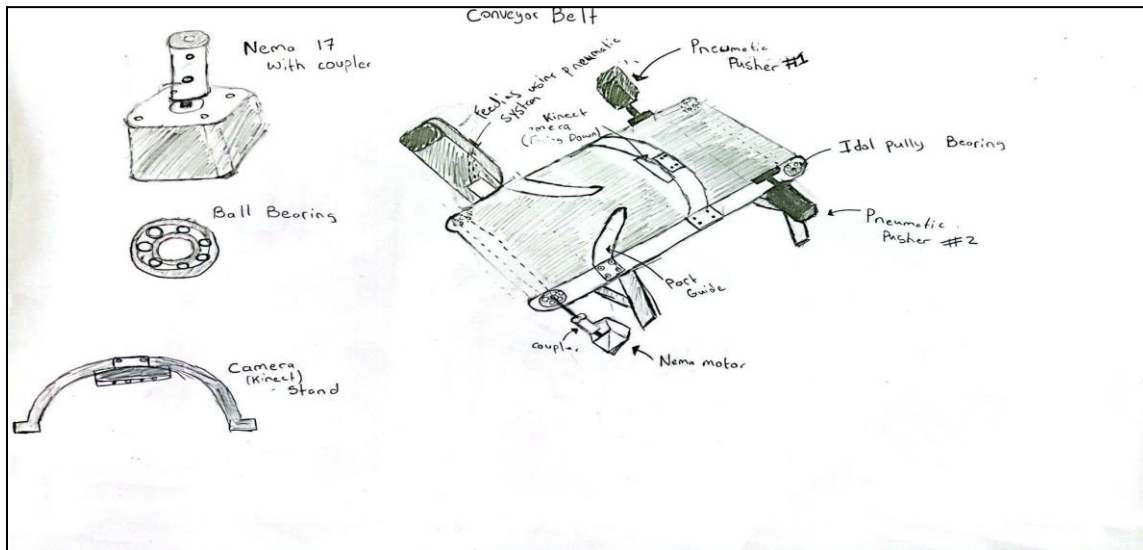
Conveyor Belt Actuator Conceptual Design
